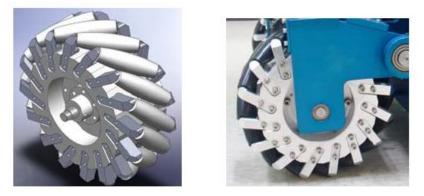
New version of Mecanum wheel (left : CAD design, right : prototype)[11]
